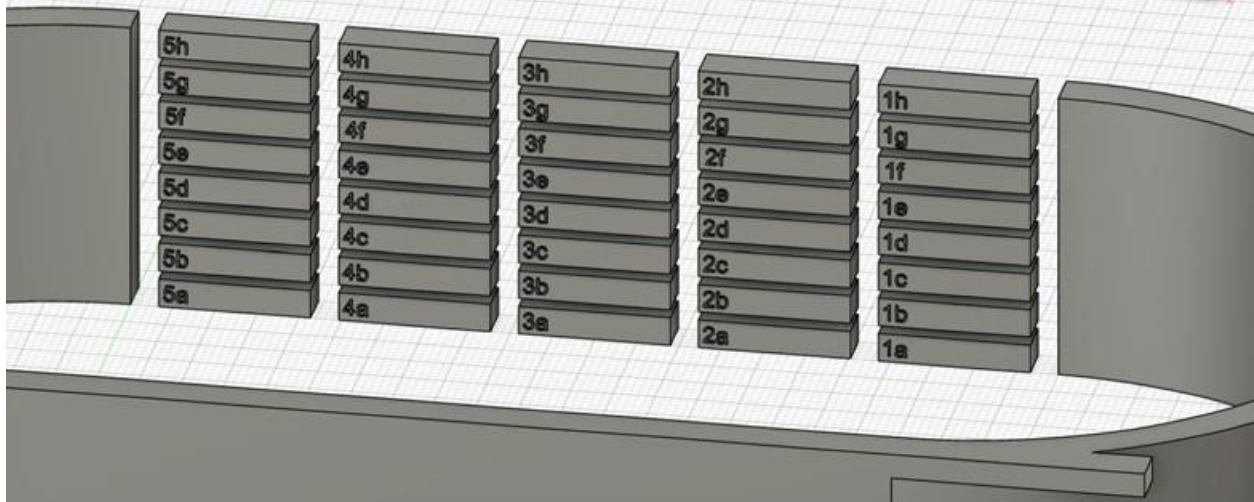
Location and label of the individual specimens of the straight stiffener ribs.
